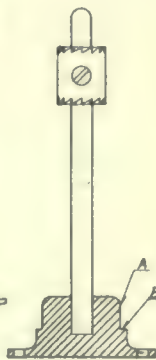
TOOL FOR FACING INSIDE OF INDENT.
